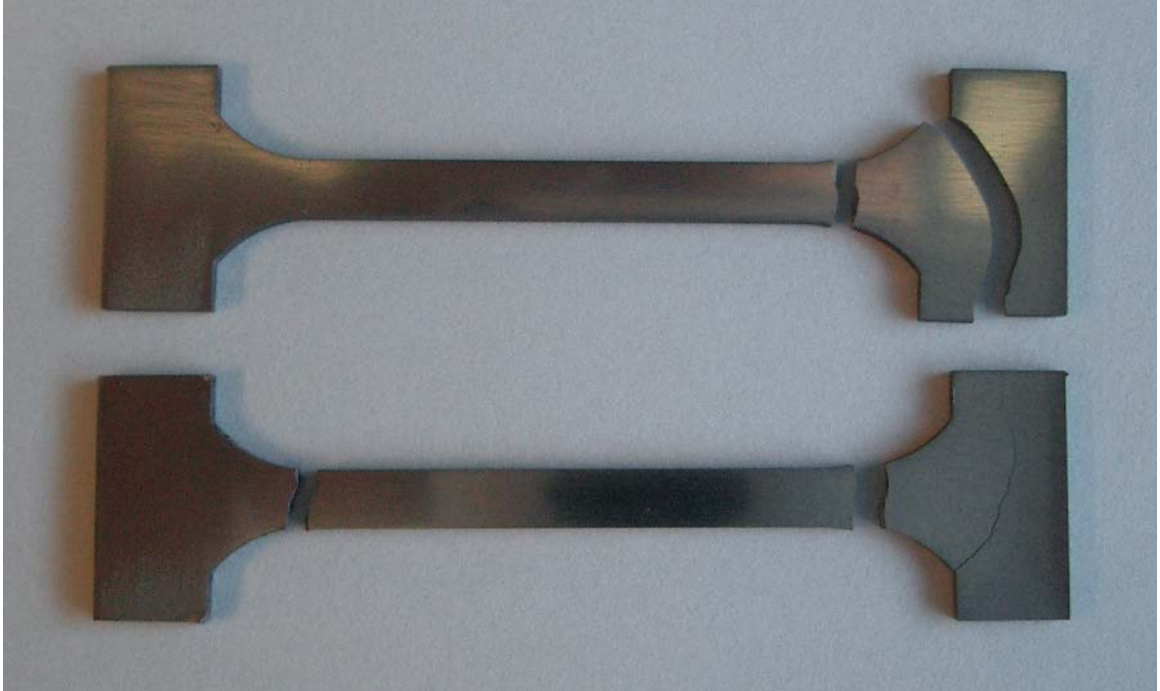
Image of the Mo-2Si-1B wt.% tensile specimens tested at 1000°C. Premature fracture occurred in the grip sections, possibly due to cross-loading.
